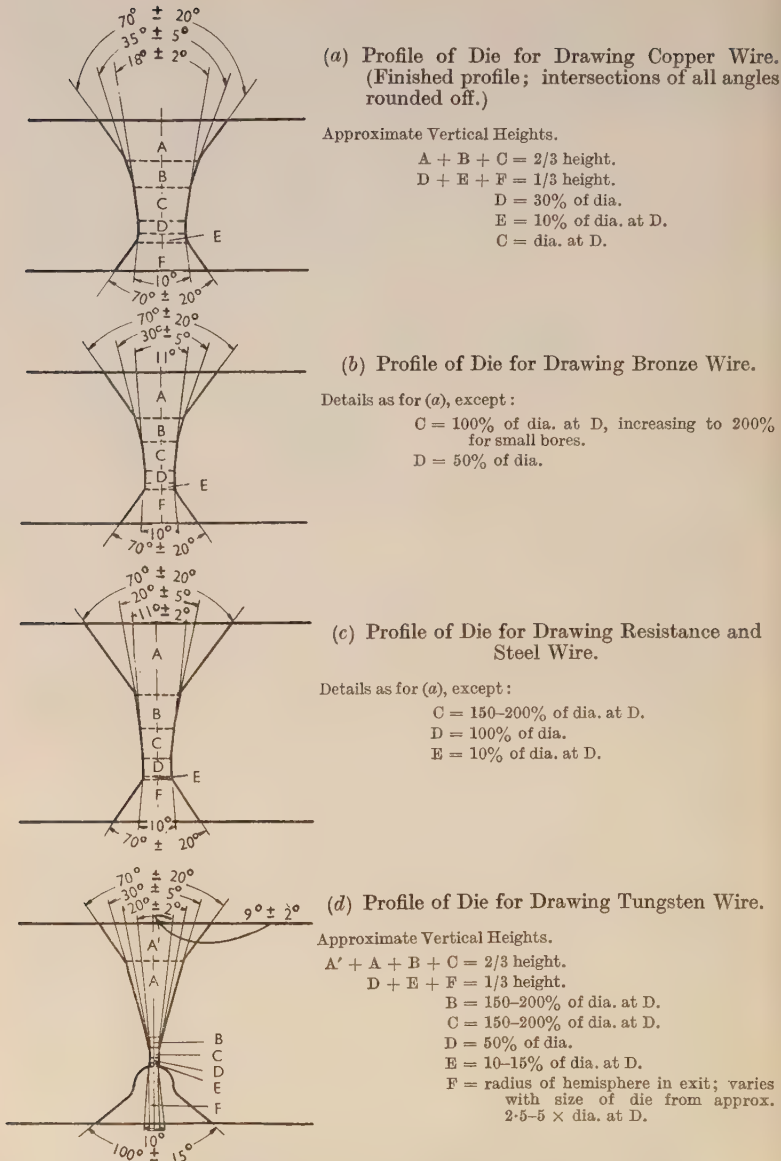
Die-Angles and General Dimensions of Diamond Dies.
